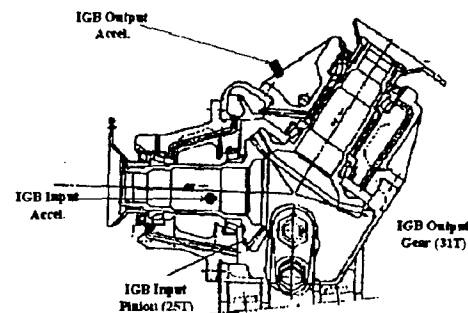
SH-60 Intermediate Gearbox Cutaway.
